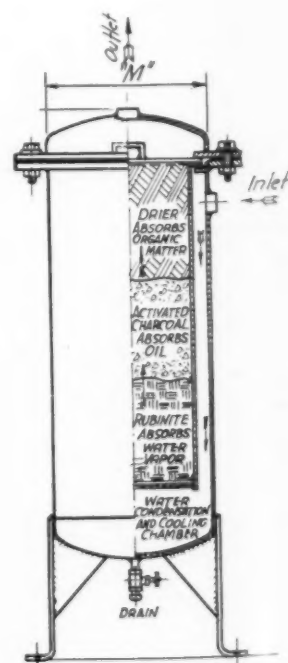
Descriptive drawing of mechanical and chemical air purifier.
